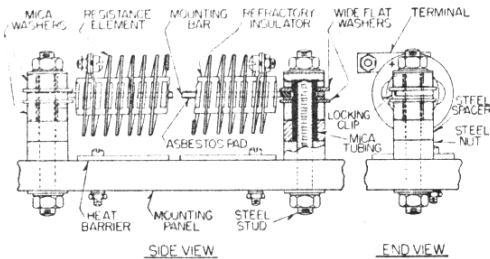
Construction of a Type HM Resistor Unit and Mounting (Dwg. 5-C-2684)
